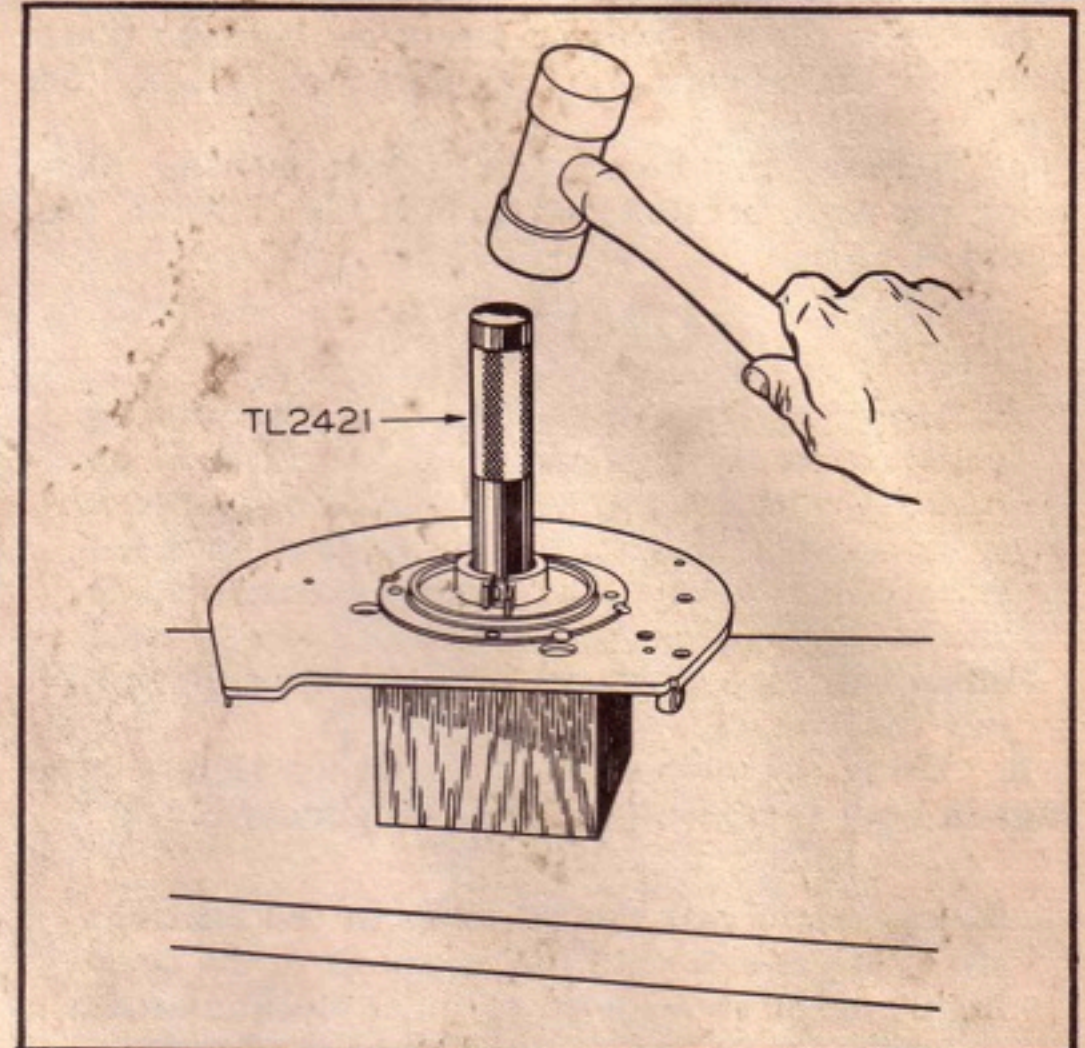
Driving Crankshaft Bearing Out of Bearing Plate
